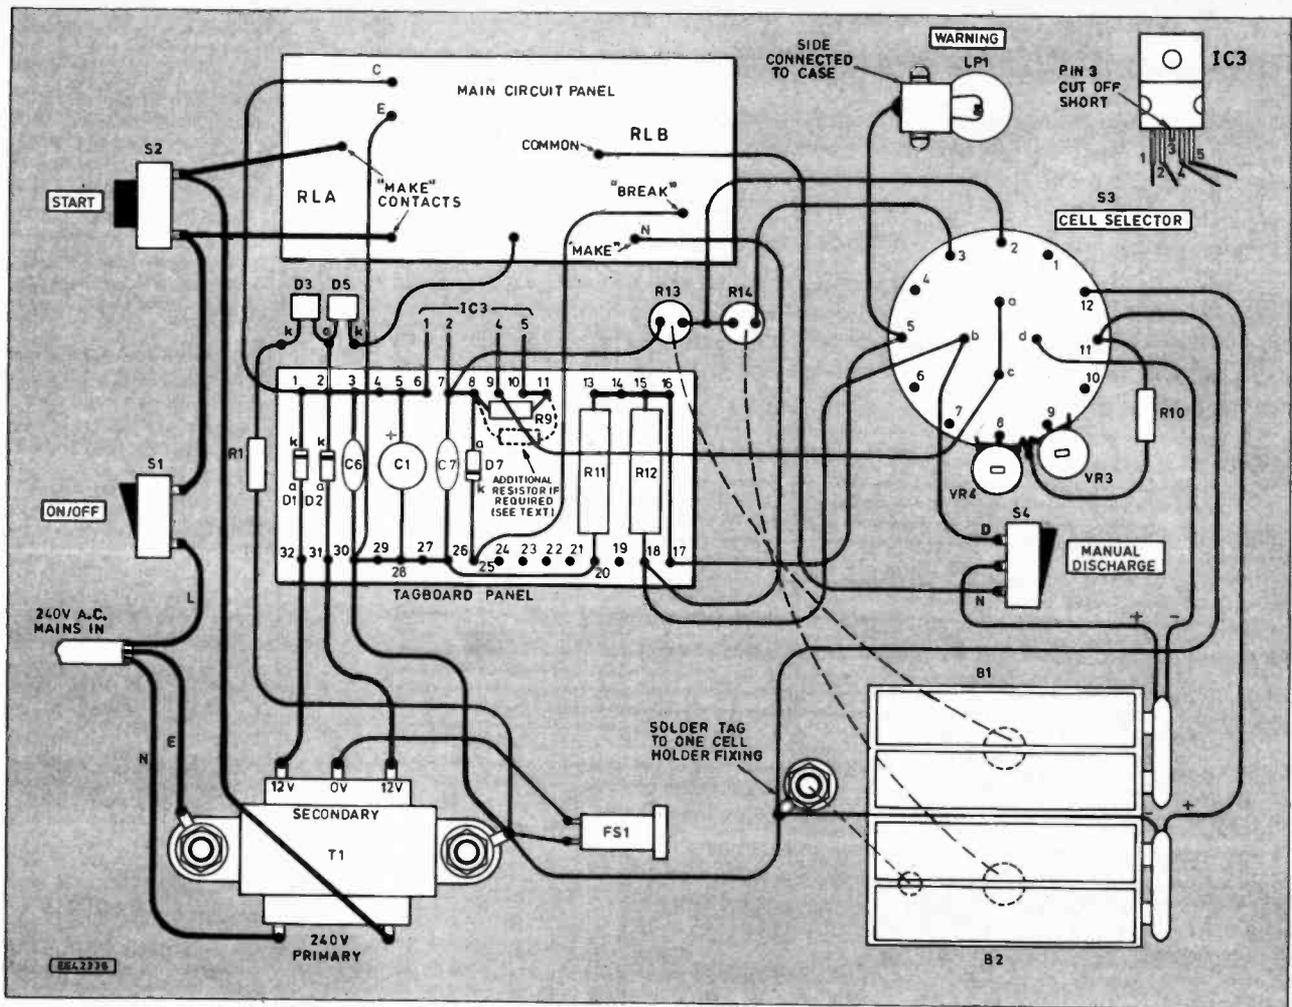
Interwiring between the two boards and all off-board components. Connections to relay RLA "make" contacts are made by soldering 3A (minimum) mains wire direct to the relay tags.
